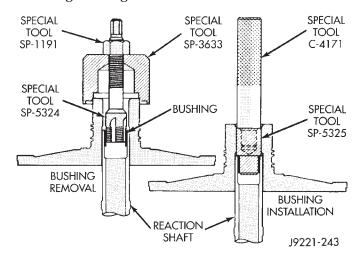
Replacing Reaction Shaft Support Bushing ASSEMBLY
